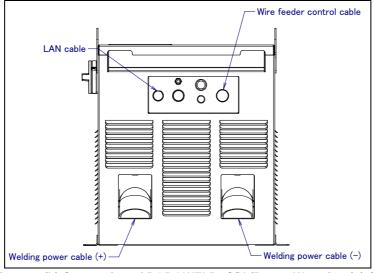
(b) Connection of ROBOWELD iC/H (Power Wave i400) (2/7)
